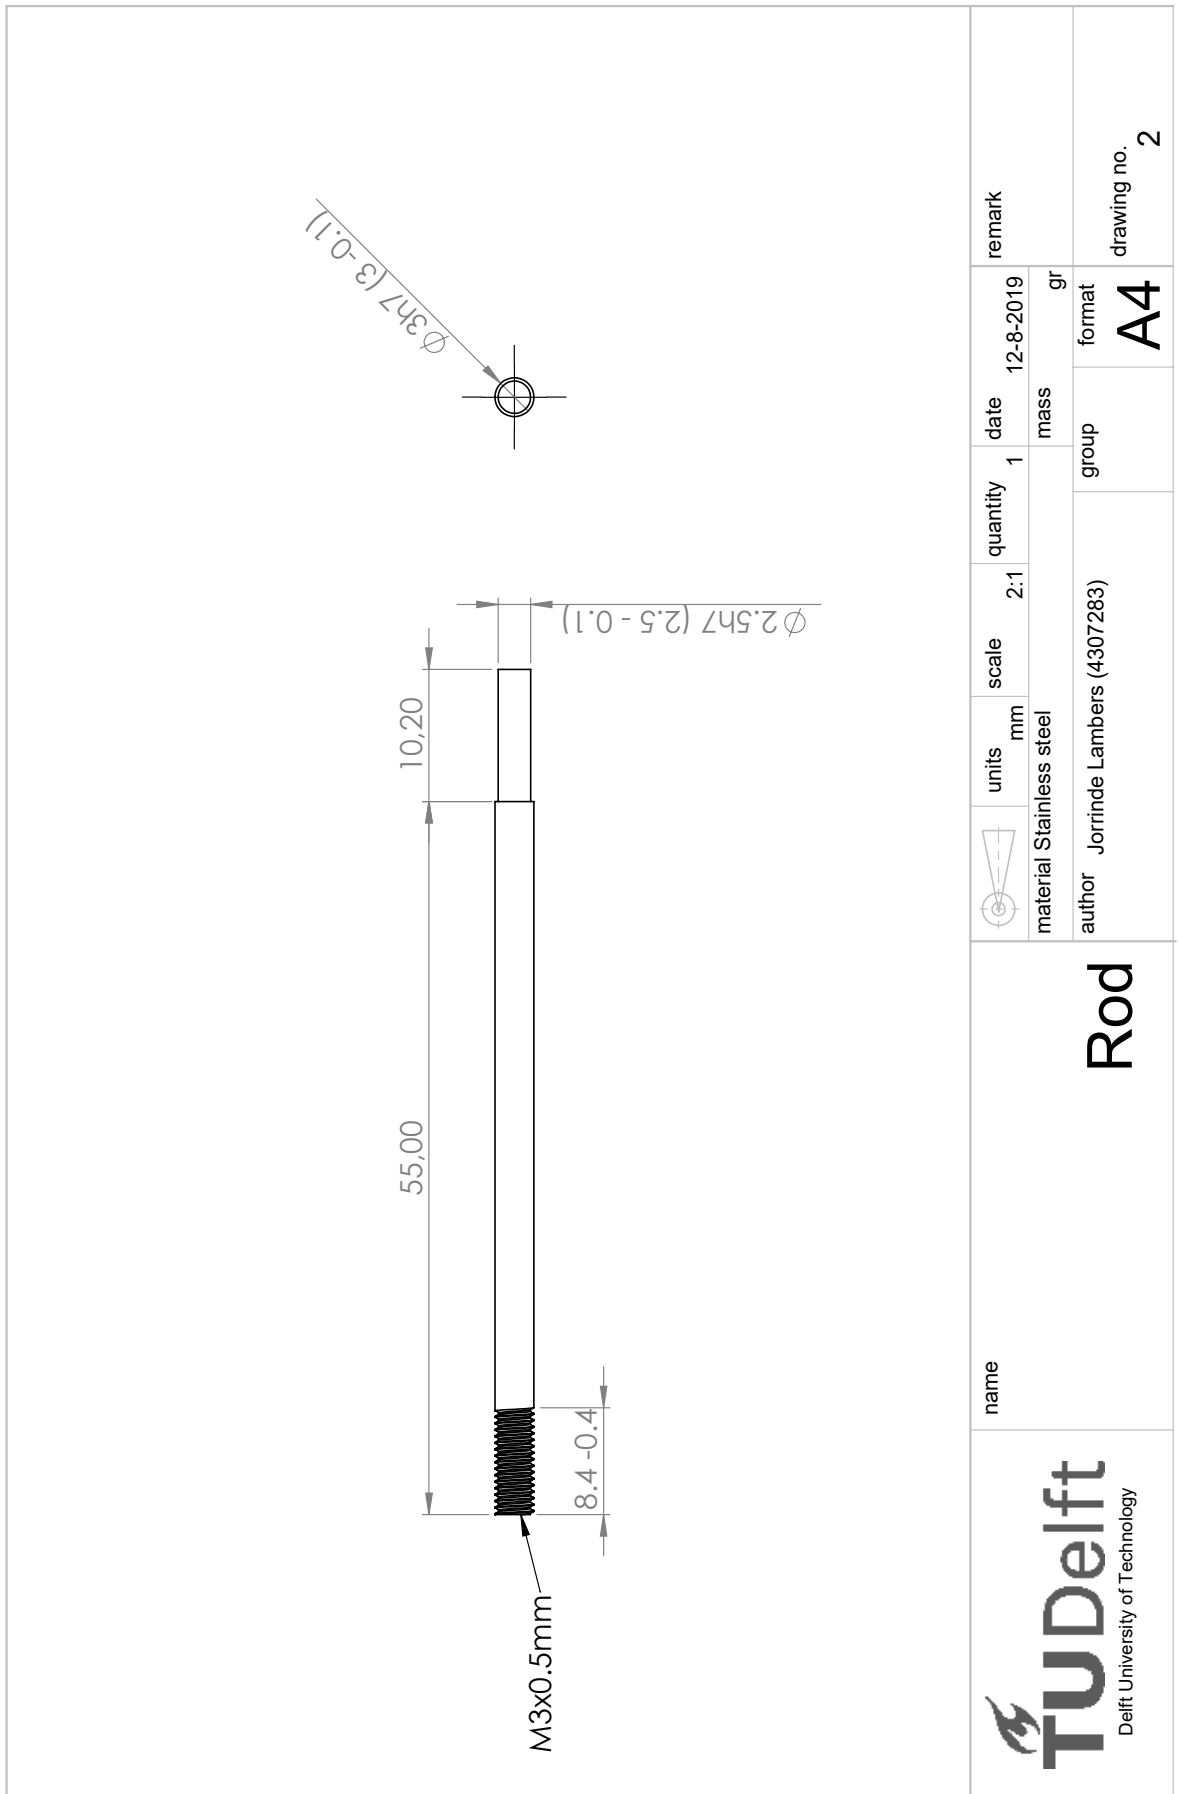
SolidWorks drawing of component number 2: Rod.
